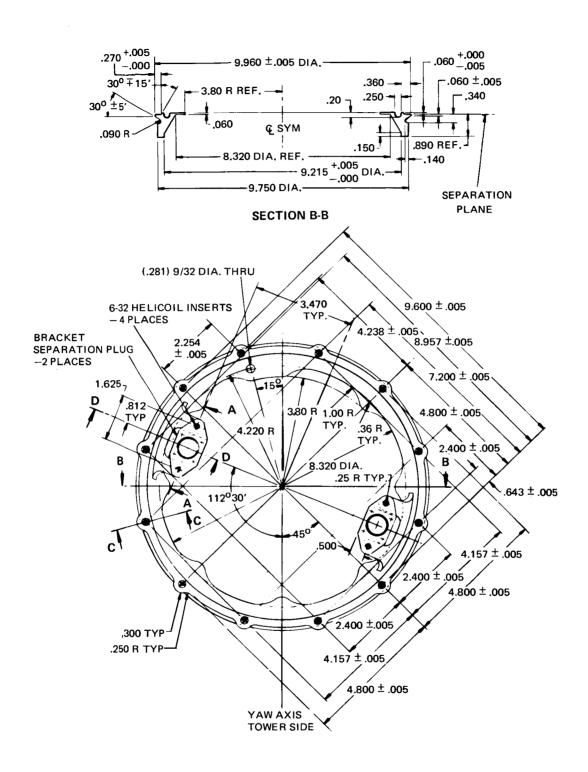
"EG" SECTION ADAPTER INTERFACE (SHEET 1 OF 3)
